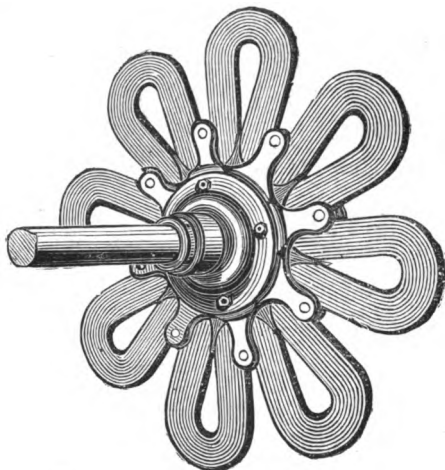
Armature of “Ferranti” Dynamo Machine.
